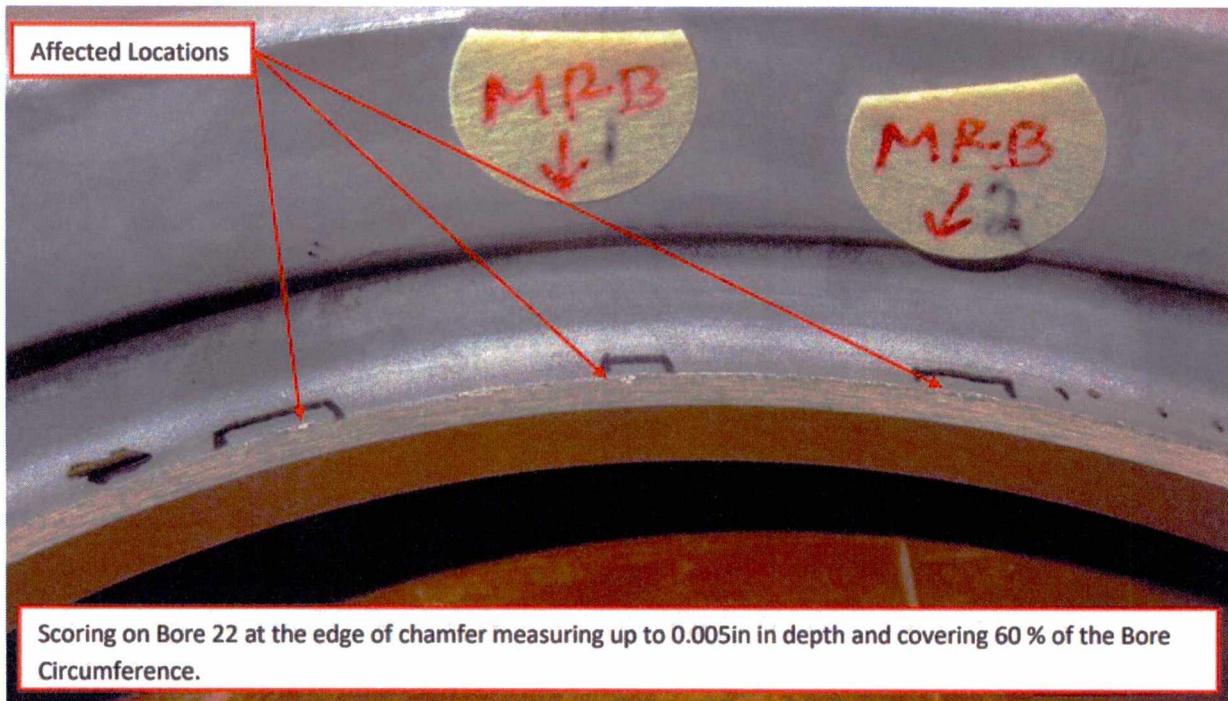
View to show scoring on the sleeve abutment face and chamfer of the Bore at Location 22
